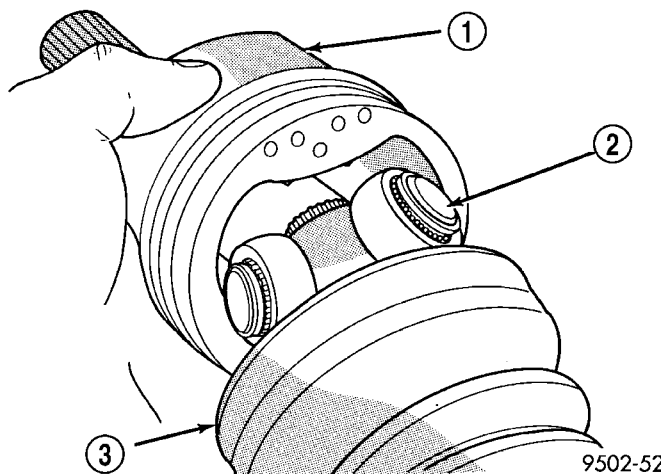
Spider Assembly Removal from Tripod Joint Housing
